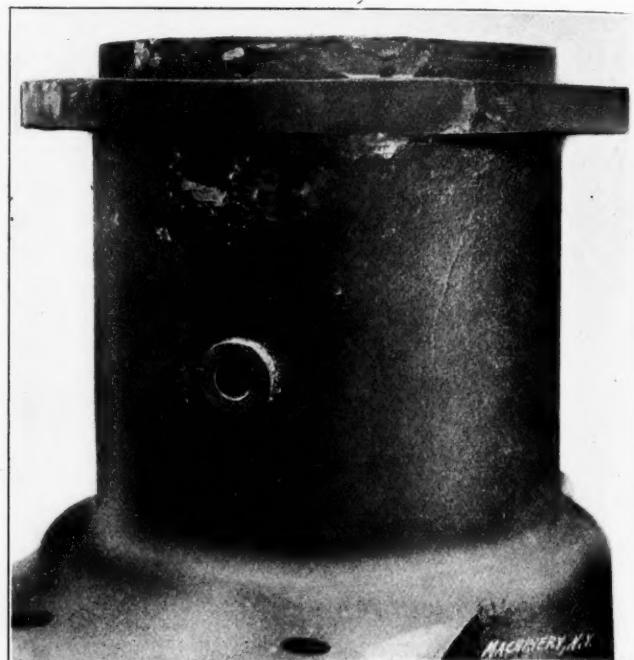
Enlarged View of Cylinder in Fig. 1, showing Part repaired without Impairing Finished Surface on Inside.
